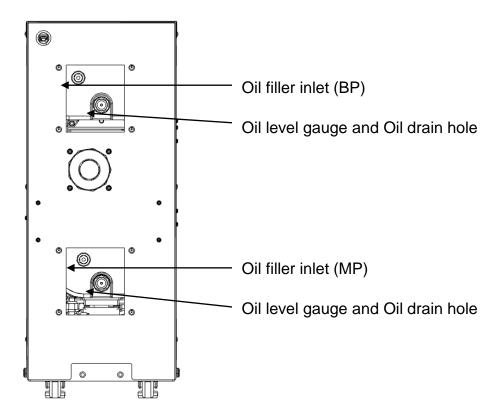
Oil filler port, oil level gauge, and oil drain port positions
